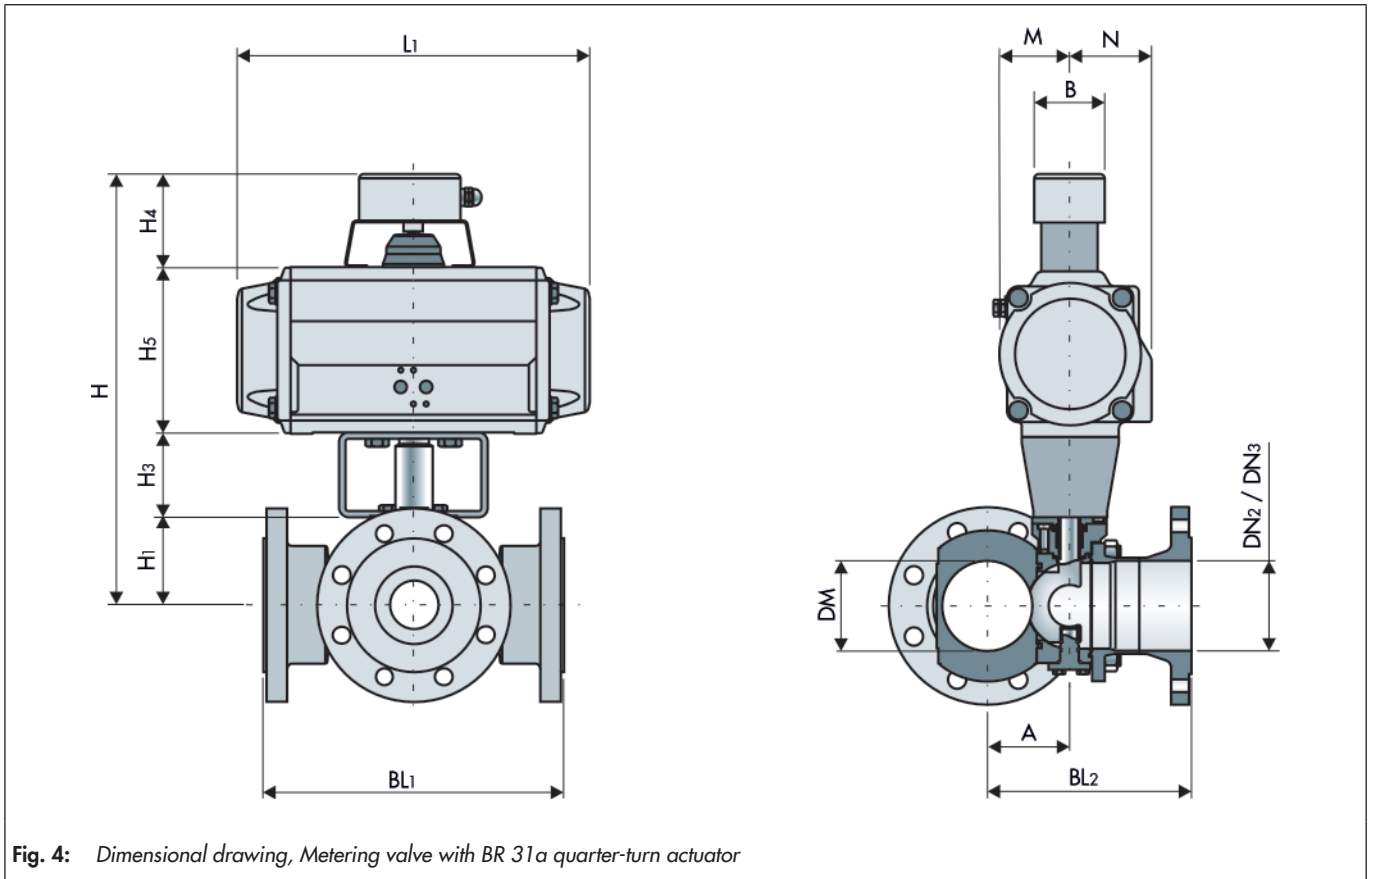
Dimensional drawing, Metering valve with BR 31a quarter-turn actuator
